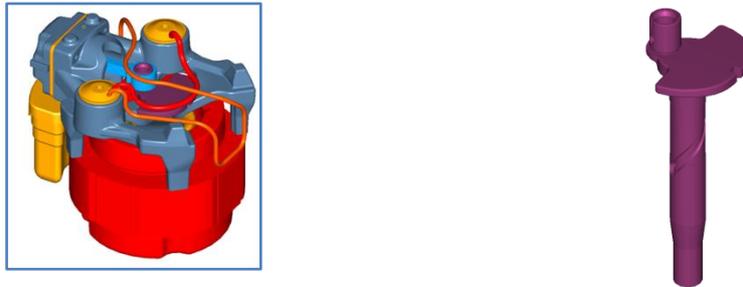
Assembly view of Type-A refrigerator compressor and the crankshaft
